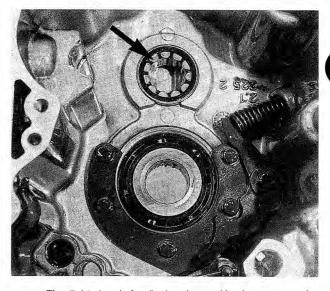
Layshaft roller bearing position in rear transmission housing with large side of cage facing up (arrow).
